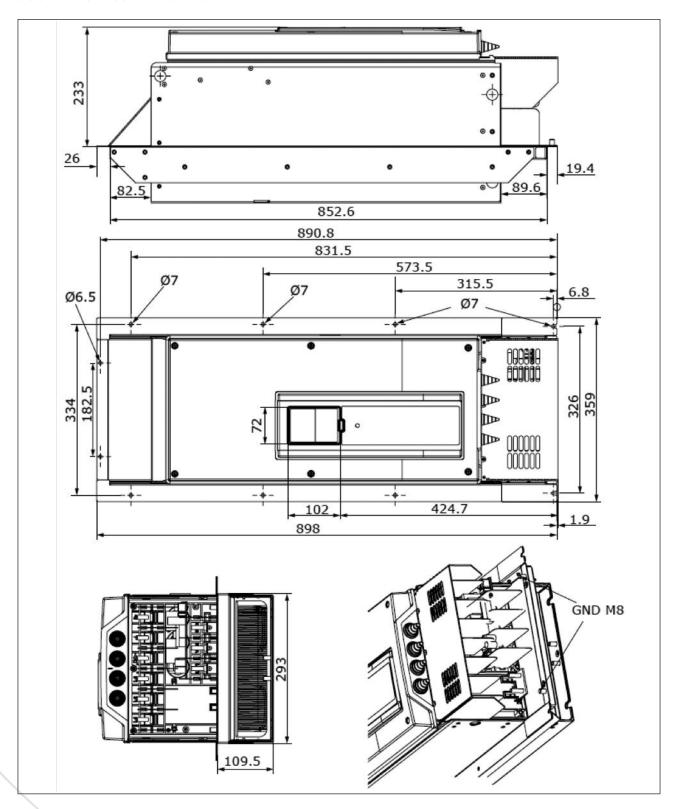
The dimensions of the AC drive, flange mounting, MR8
